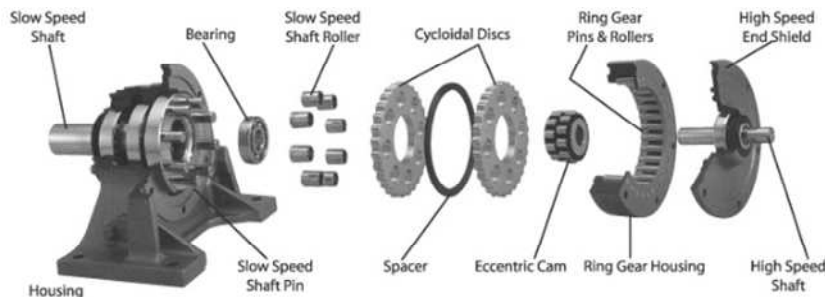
Cycloidal drive components (Picture Source: <http://www.gearmotor.com.my/cyclo-drive-spares-parts>)
